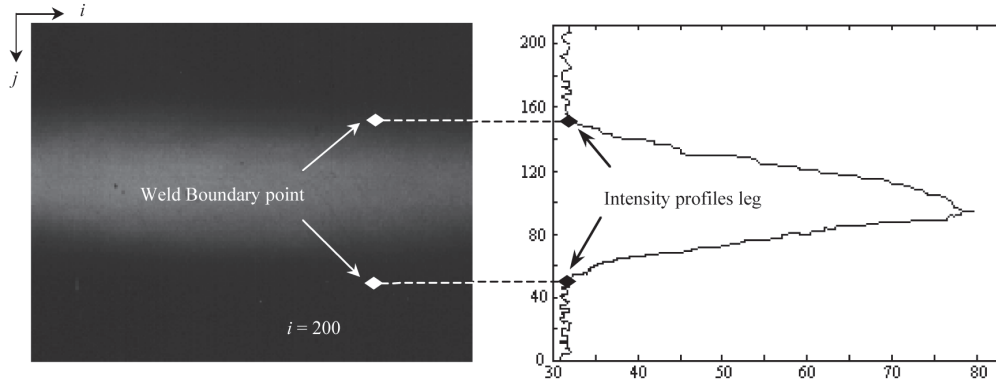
Weld boundary point location. (Source of weld radiograph: *International Institute of Welding*)
